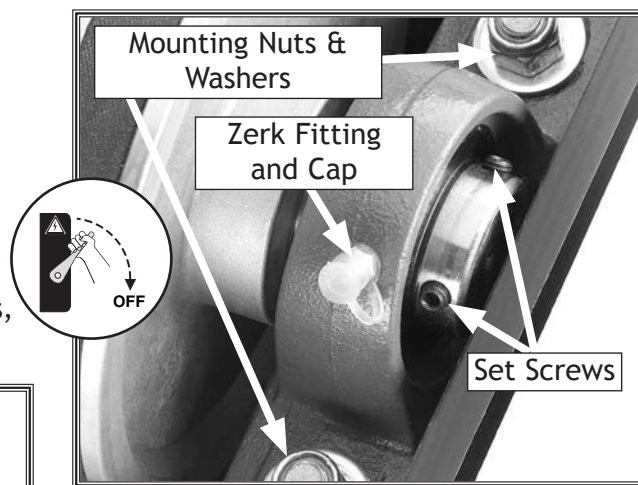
Pillow bearing mounting nuts, washers, and set screws.
